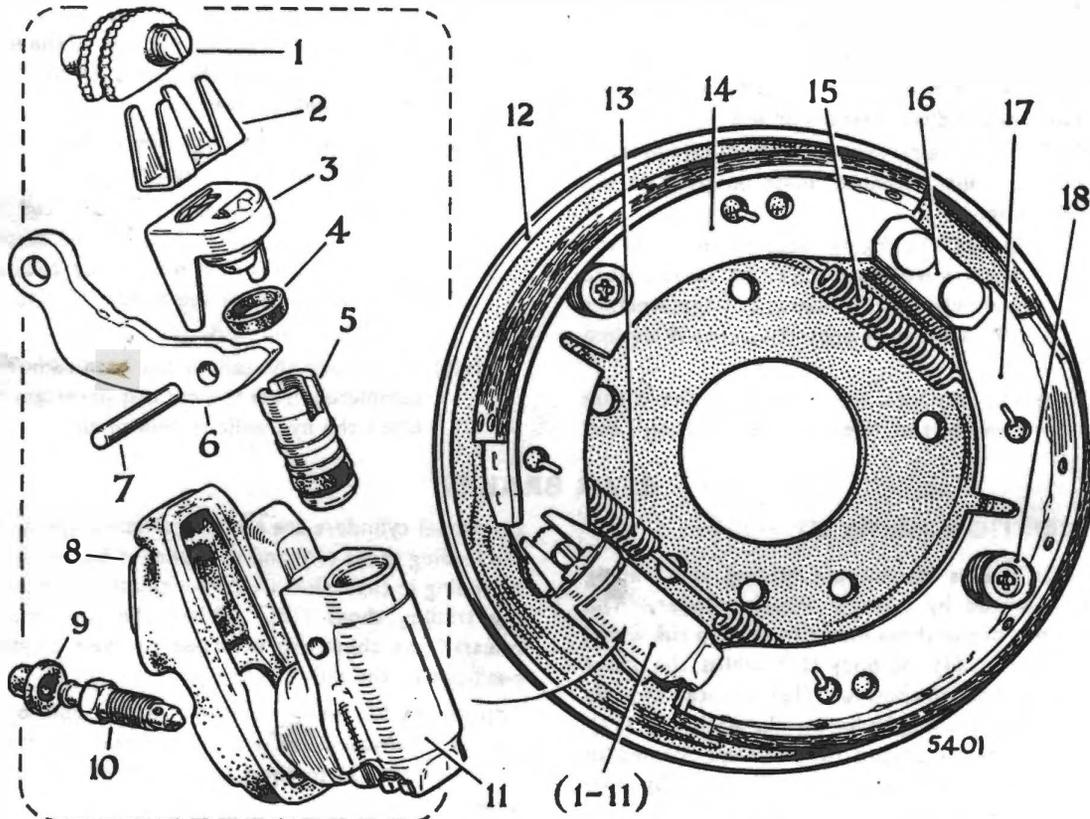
Exploded view of rear brake—right-hand side illustrated
